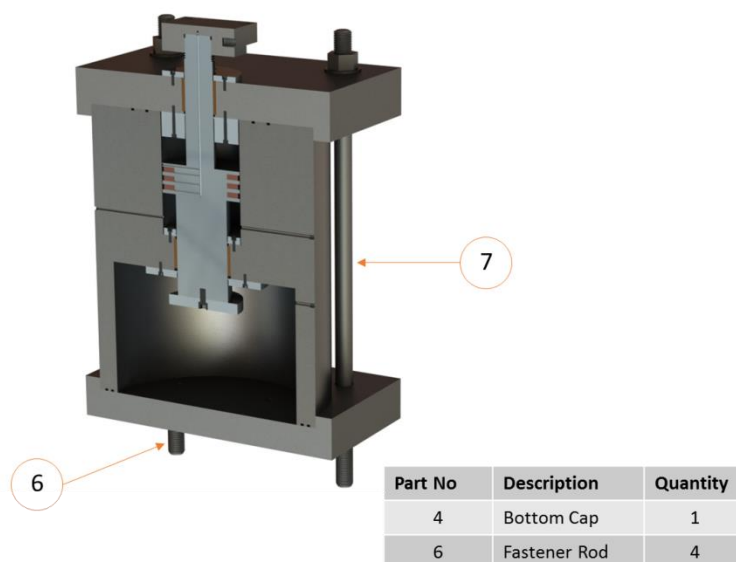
Step 7: Install the bottom cap and fasten the external fastener rods on the top and bottom Caps.
